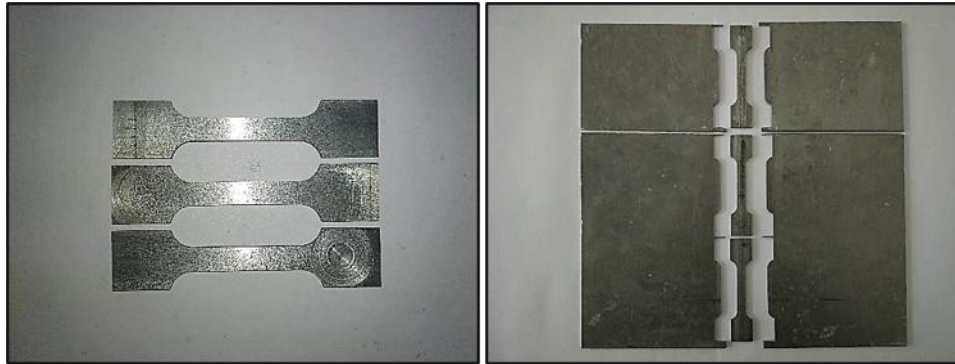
Tensile test specimen of weld zone prepared from FSTWB
